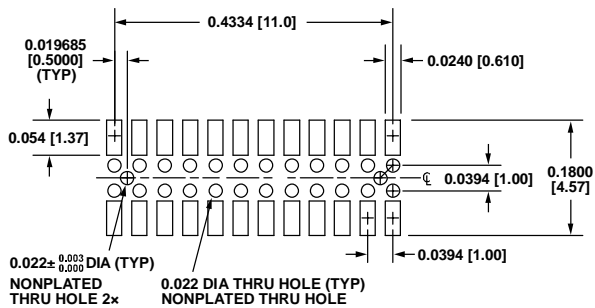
Suggested Layout and Mechanical Design When Using Samtec CLM-112-02-G-D-A for the Mating Connector
